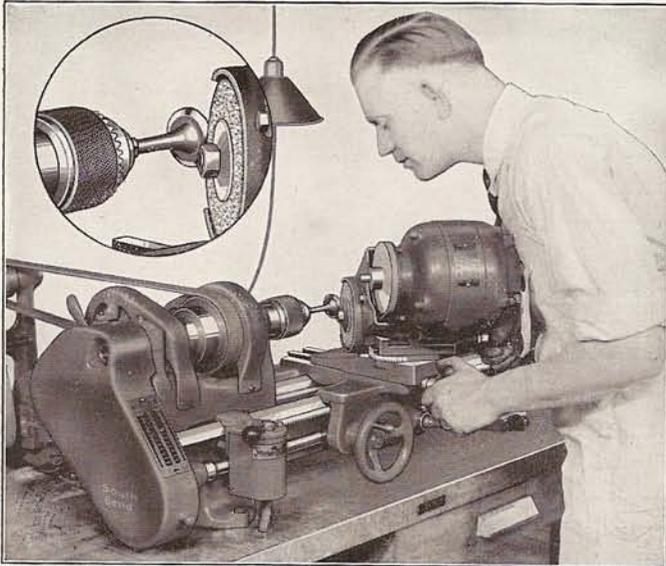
Grinding a Valve in the 9-inch "Workshop" South Bend Lathe Using Electric Grinder and Precision Valve Chuck.
